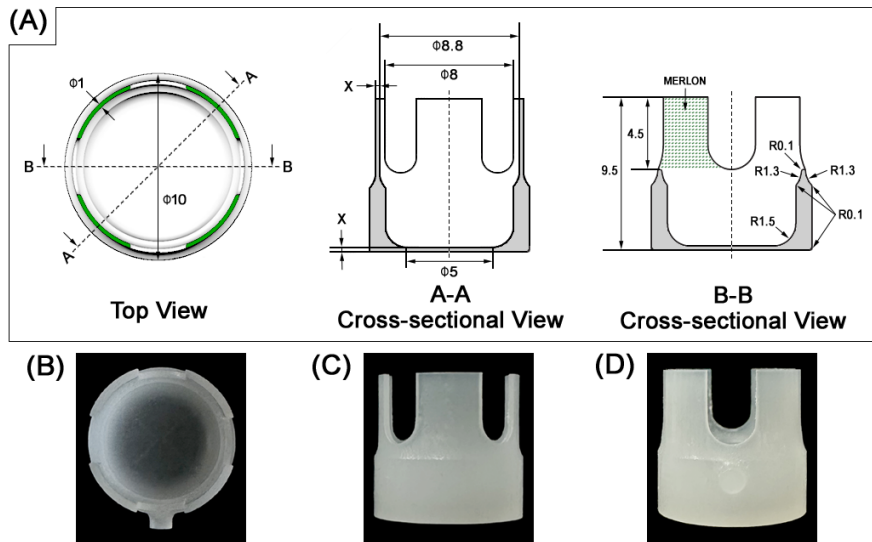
Merlon fracture test model specified in ISO 18675: (A) Basic drawing, (B) Top view, (C) A-A Cross sectional view, (D) B-B Cross sectional view.
